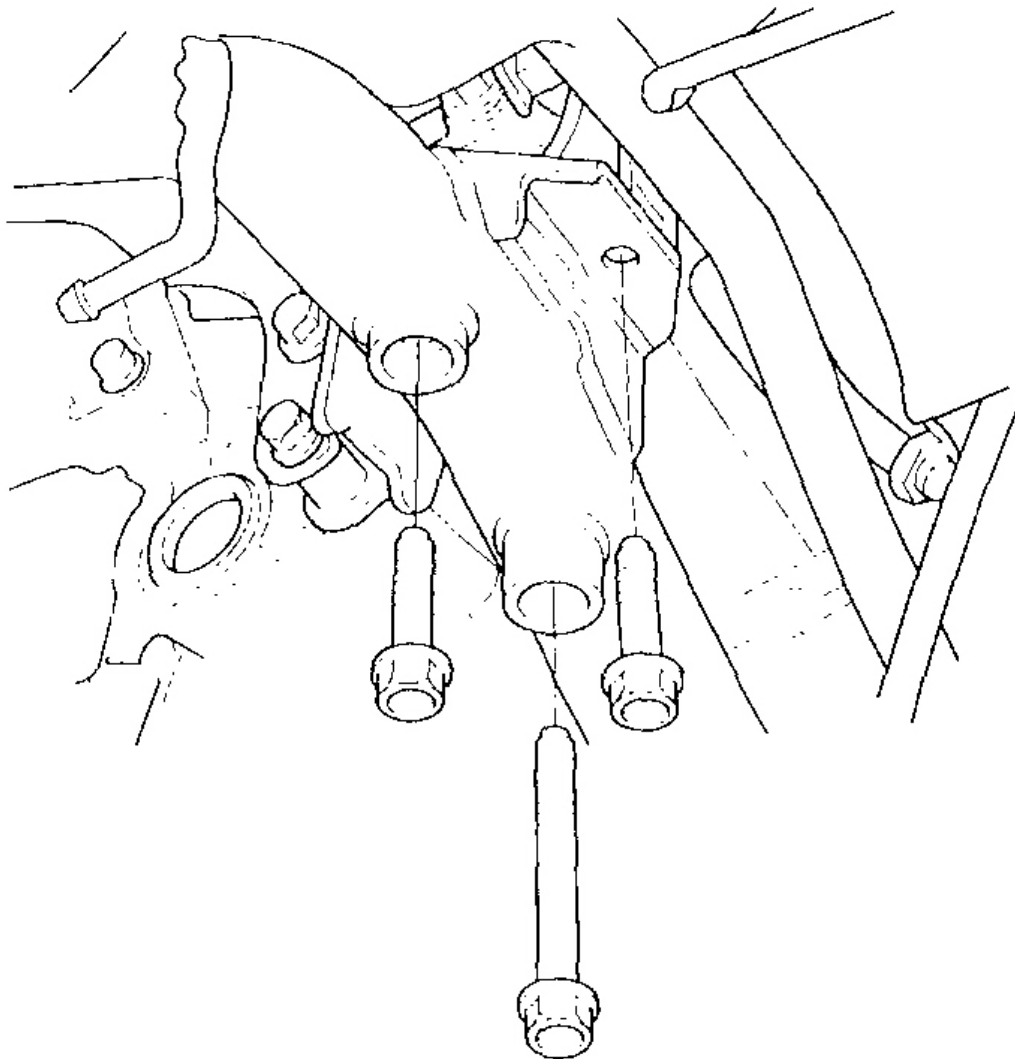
Removing Transmission Mount Bracket Mounting Bolt/Nuts (A/T)
